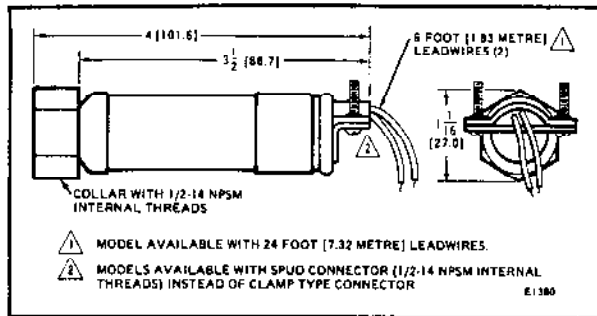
INSTALLATION DIMENSIONS OF THE 817-1743 ULTRAVIOLET FLAME DETECTOR (in in.).
